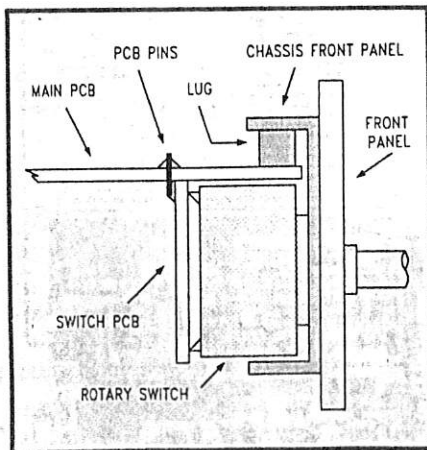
The completed PCB is a neat fit between the top panel mounting lug, and the lower edge of the chassis front panel.
